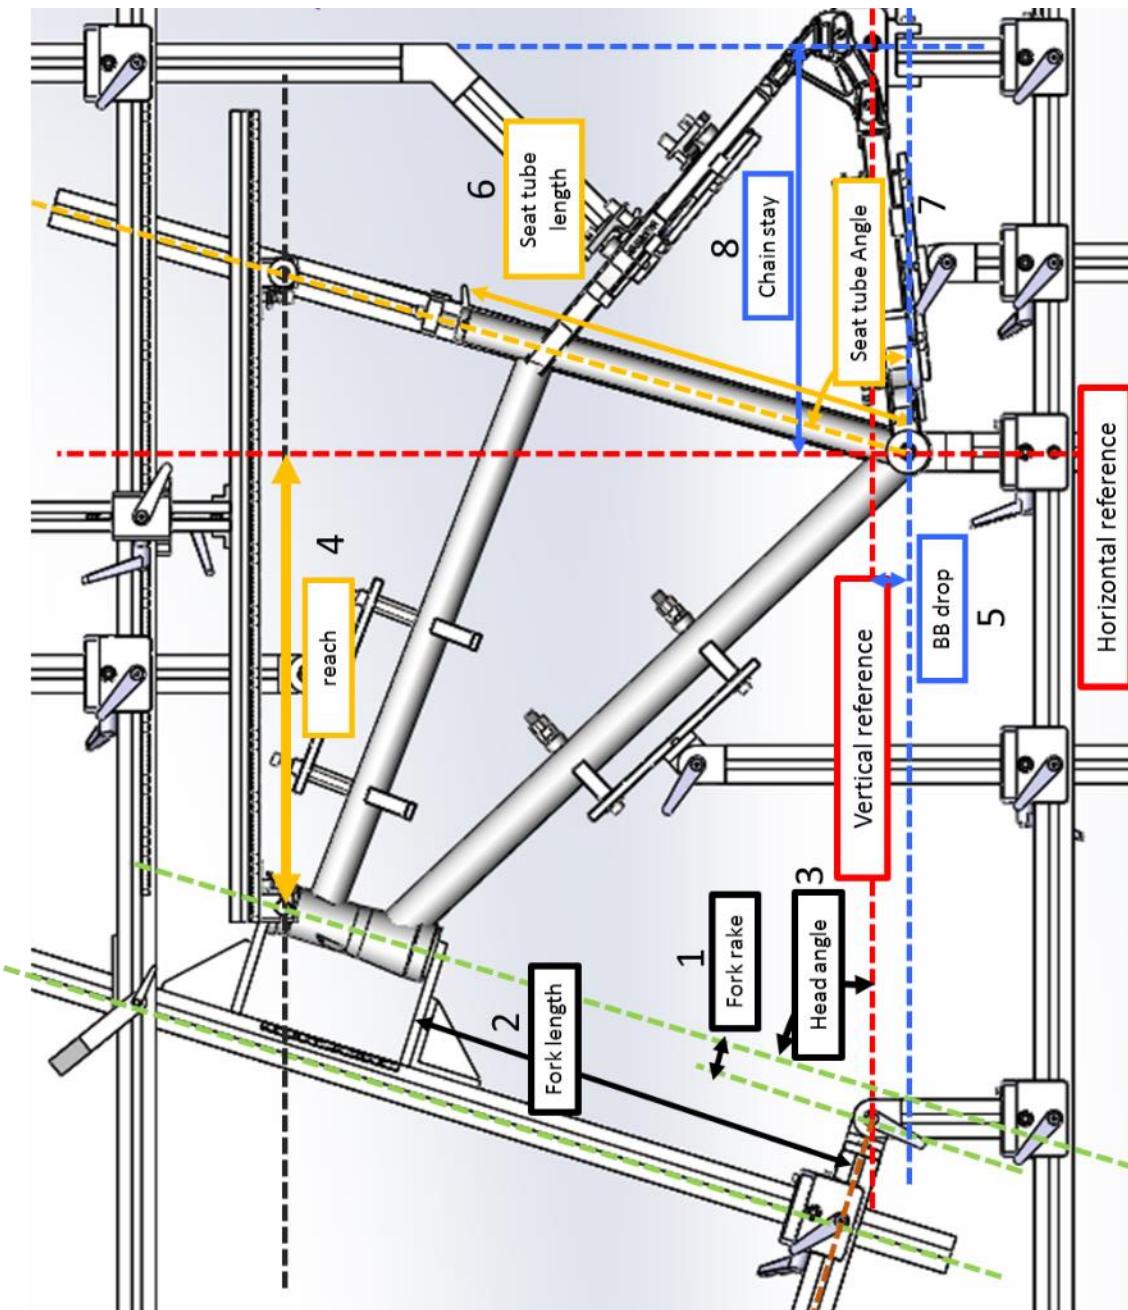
Setting order for the parameters of the new welding-jig
